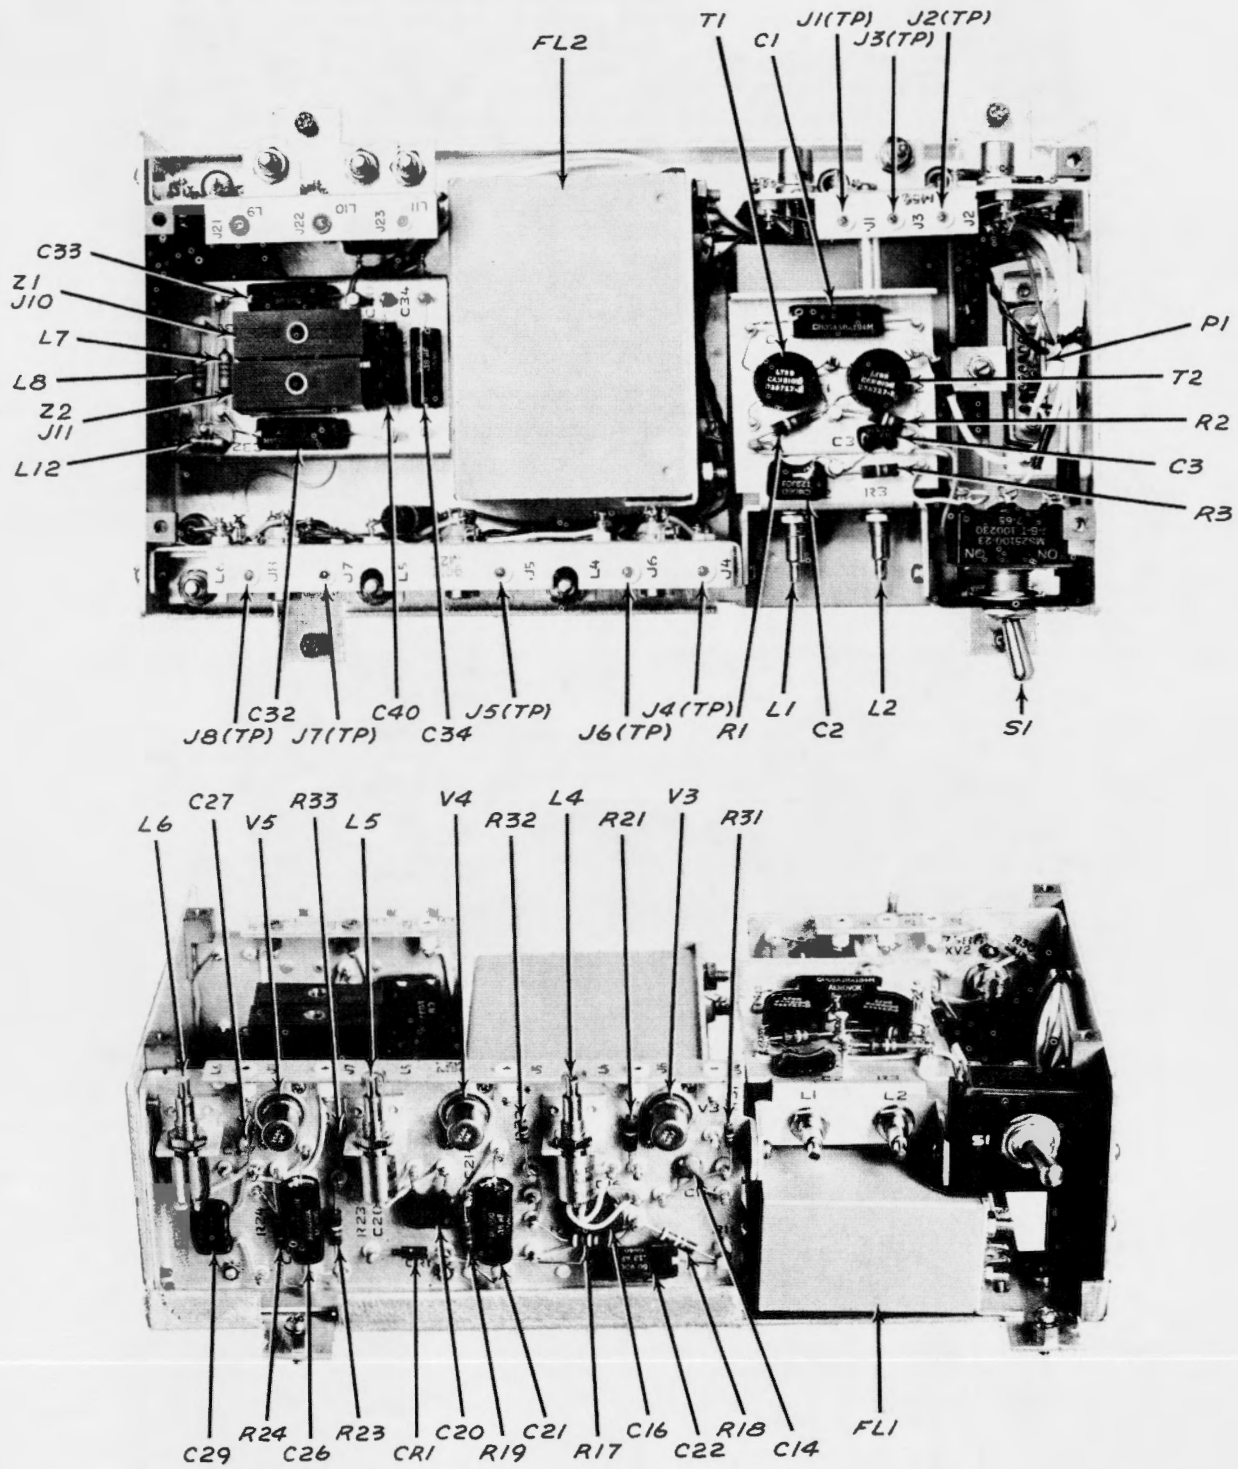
2nd Injector (A) A1A12, Parts Location and Test Points
